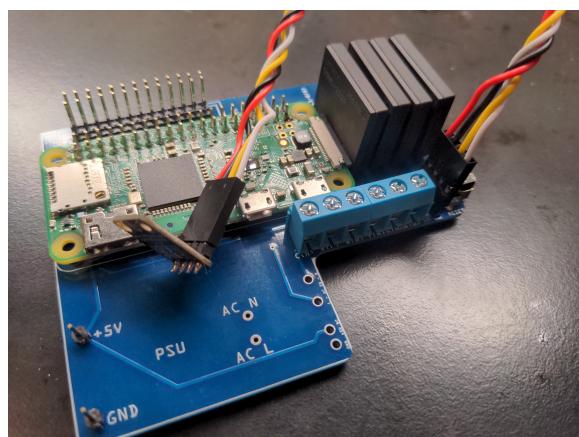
Fully assembled HestiaPi with headers for a DC power supply
